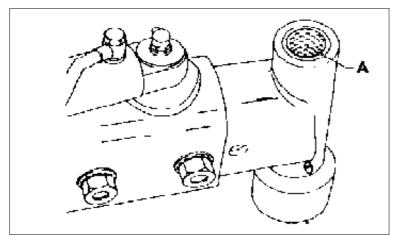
Wheel pivot bushes. A - Clearance hole
